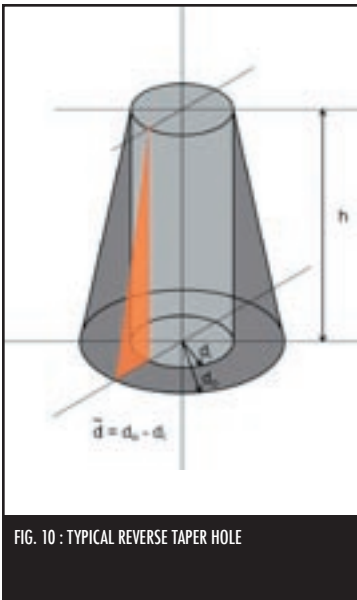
TYPICAL REVERSE TAPER HOLE
